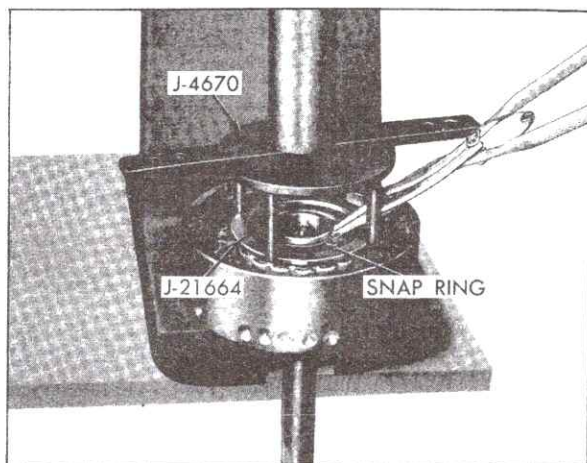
Removing and Installing Forward Clutch Housing Snap Ring
